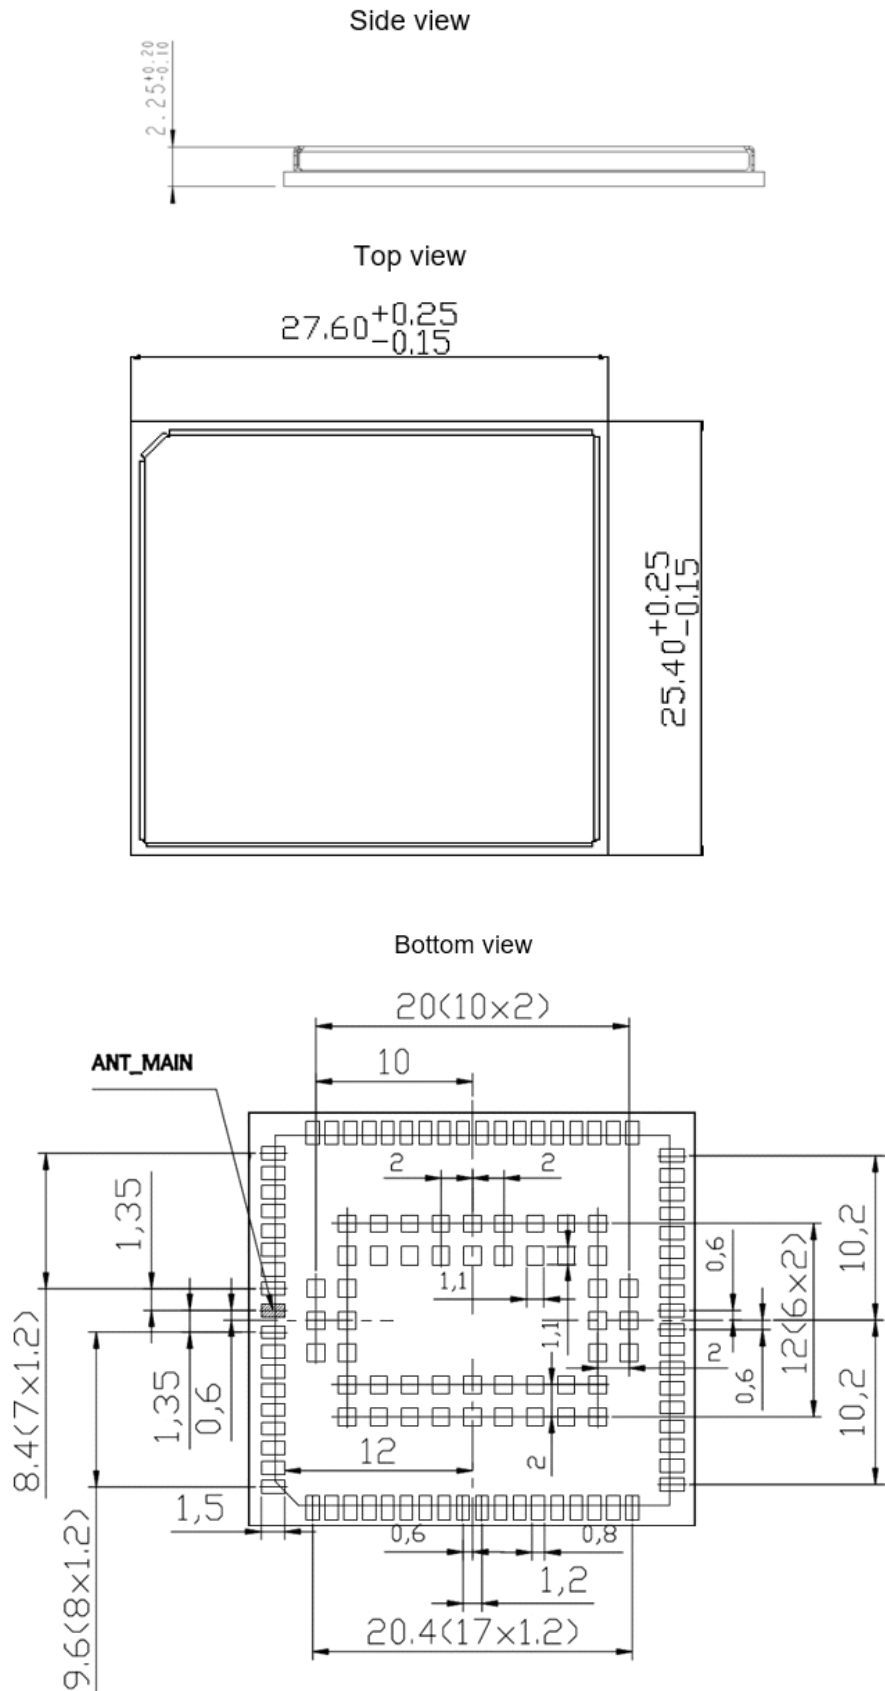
Dimensions of ELS62 (all dimensions in mm)
